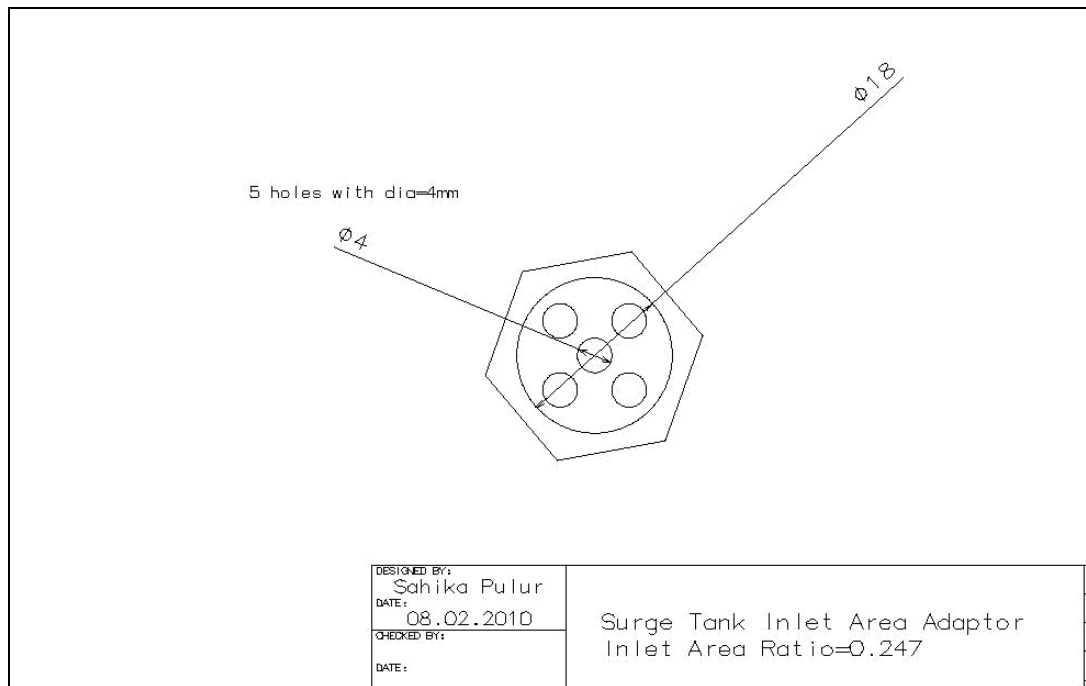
Technical Drawing of Adaptor with $r=0.25$
